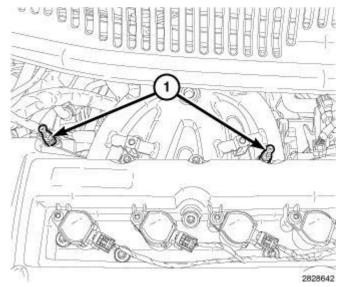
Engine Cover Mounting Posts Courtesy of CHRYSLER GROUP, LLC
